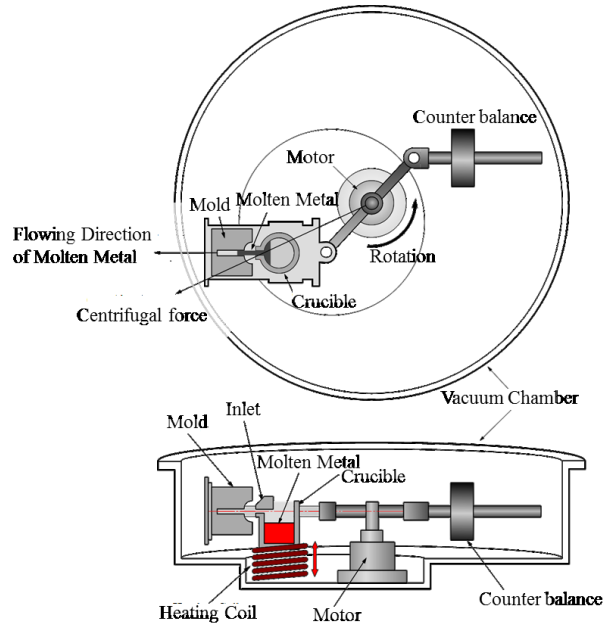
Schematic illustration of compact vacuum centrifugal caster. Upper and lower illustrations present top and cross-sectional view, respectively. The shape of casts by this machine is rod.
